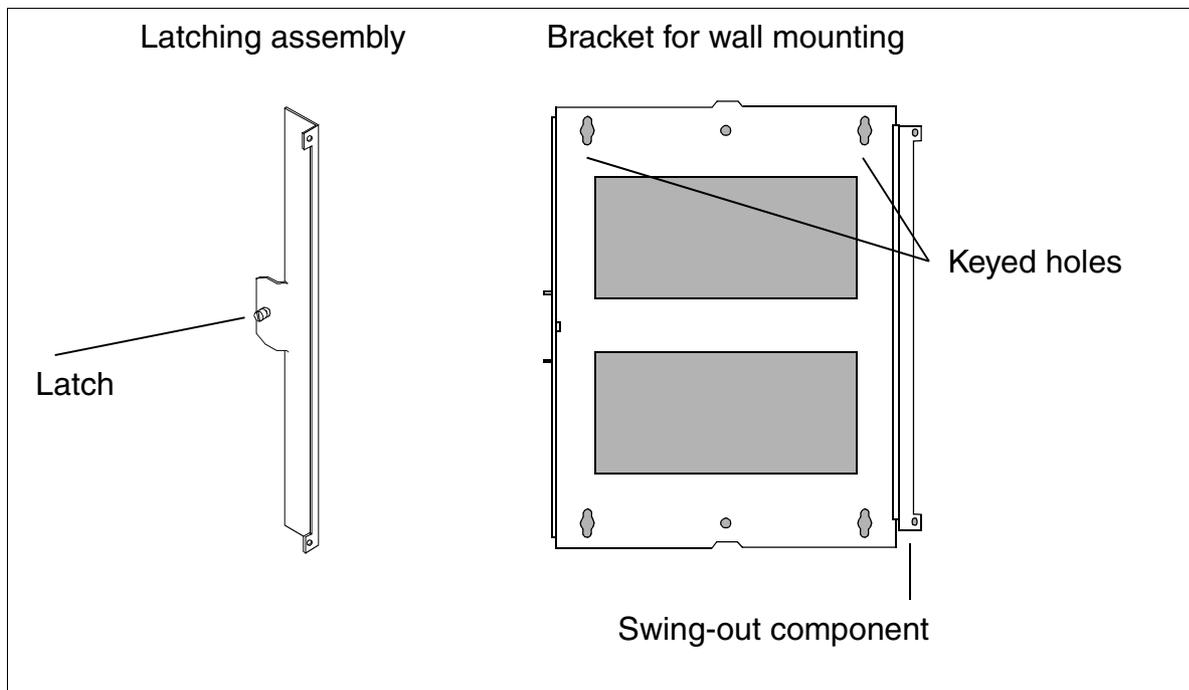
HiPath 3750 - Wall-Mount Kit (for U.S. only)
